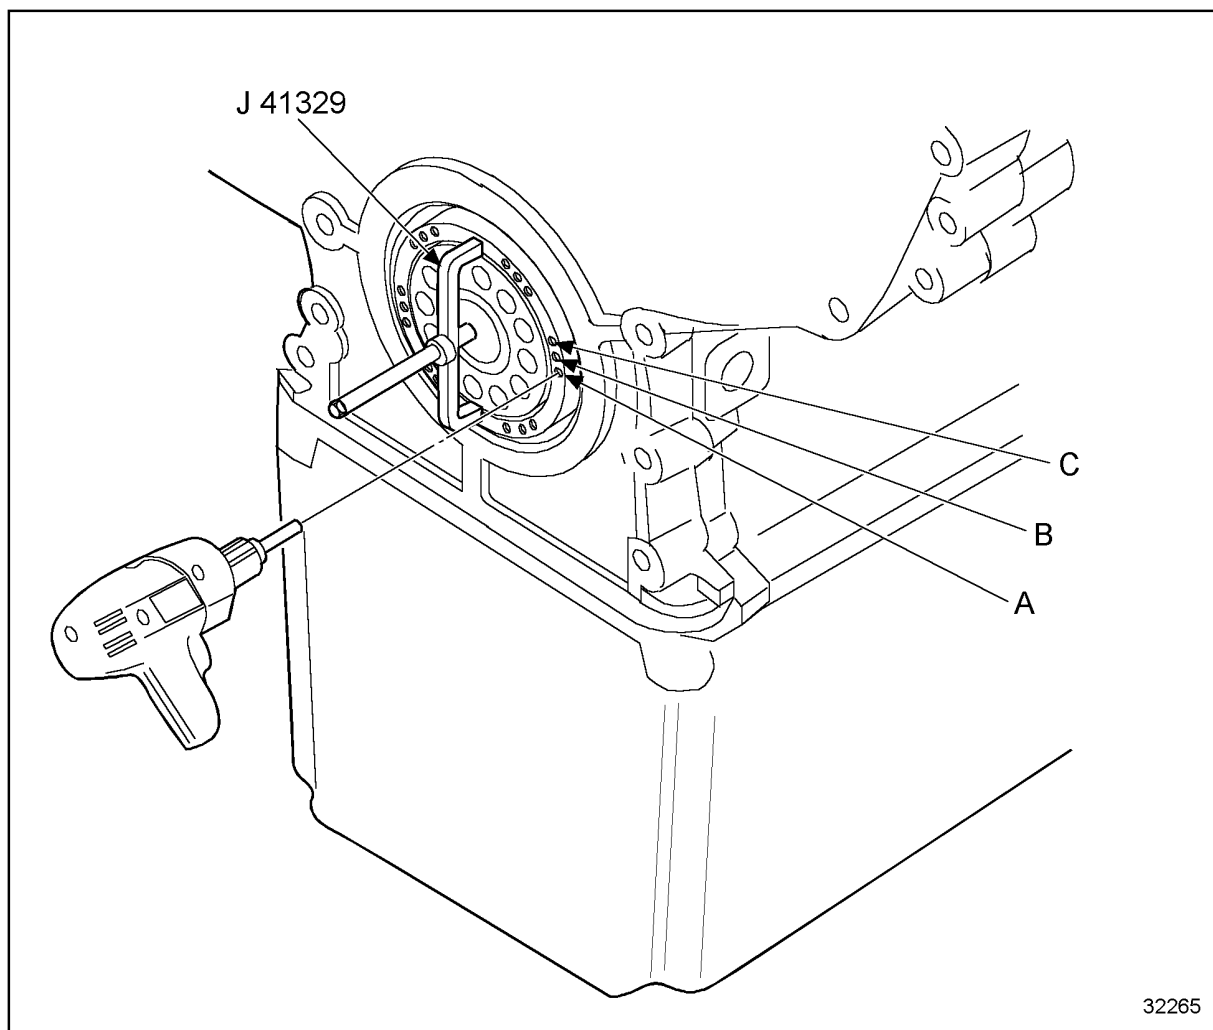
Removing Front Crankshaft Oil Seal from Gear Case Cover
